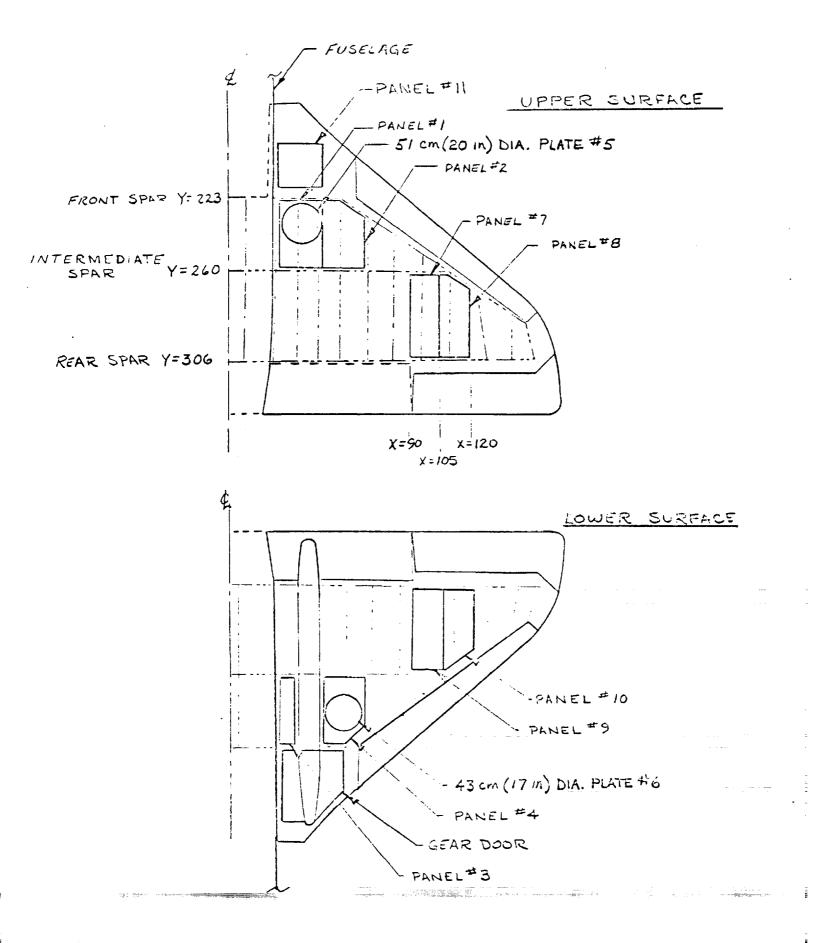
UNDAMAGED WING - ALL PANELS IN PLACE
